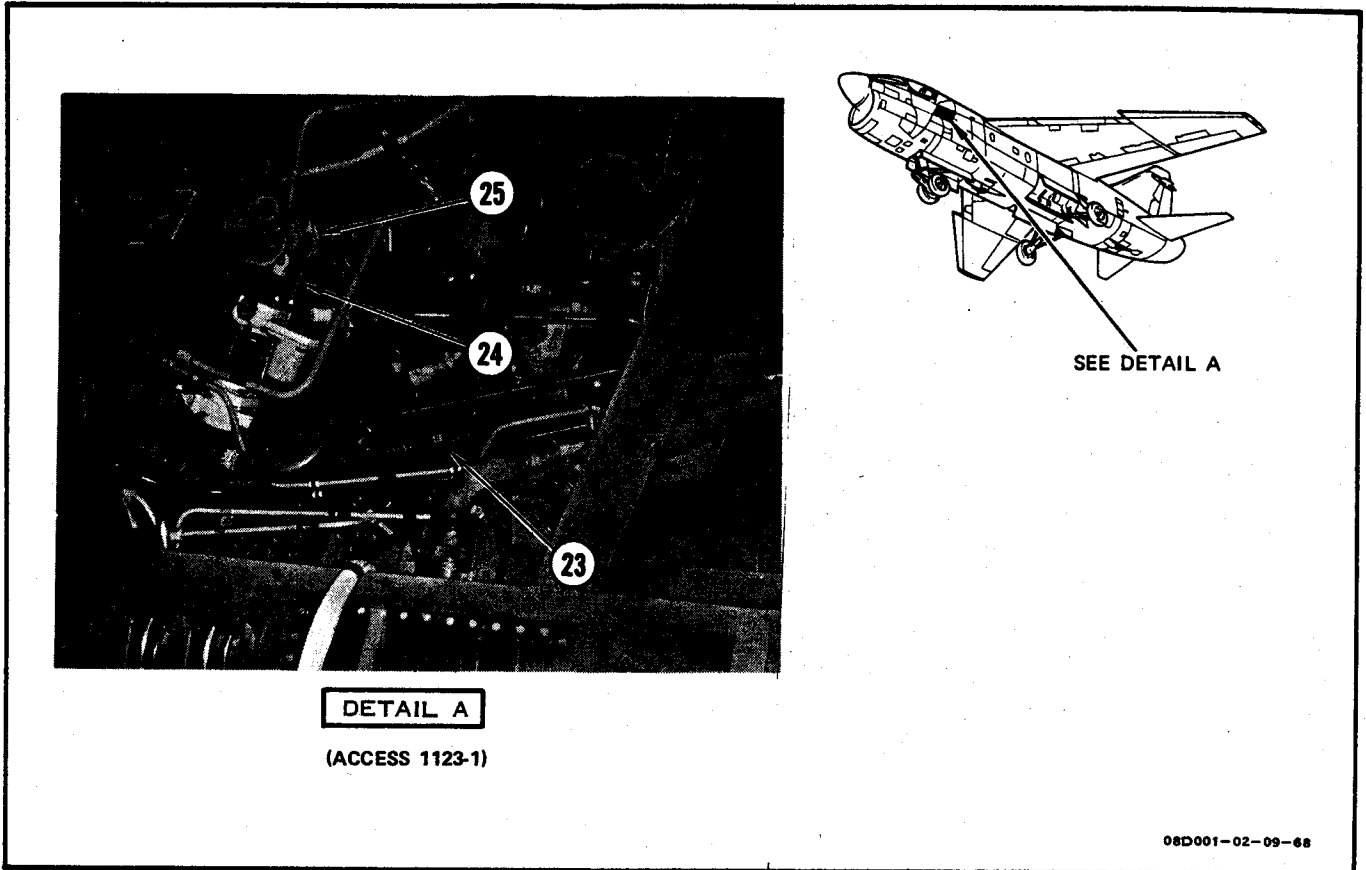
Control Stick Assembly Removal and Installation (Sheet 2)
